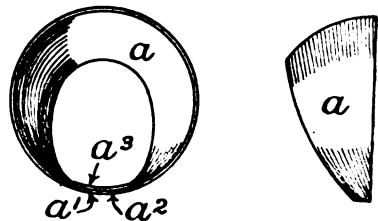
SHOWING SHAPE OF COWL AFTER BEATING AND "DRAWING."
